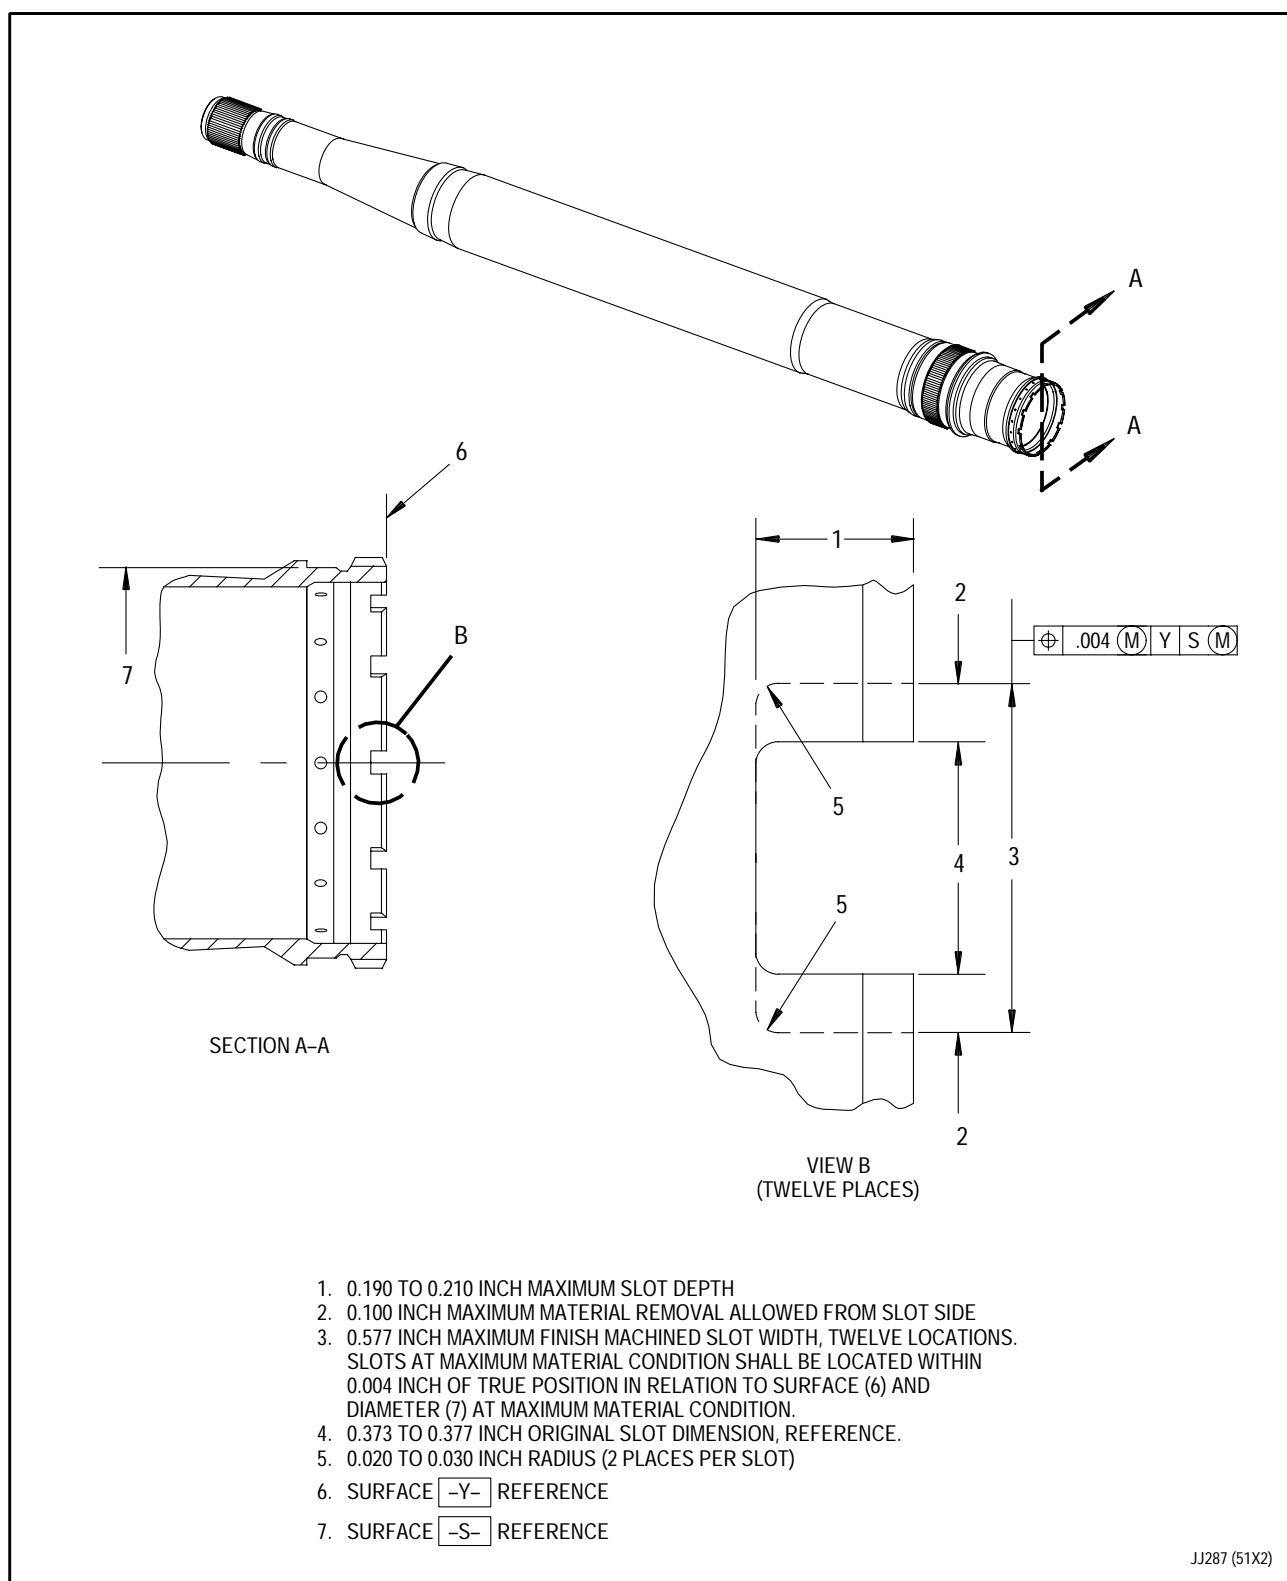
Front Compressor Drive Turbine Shaft - Slot Damage Repair
